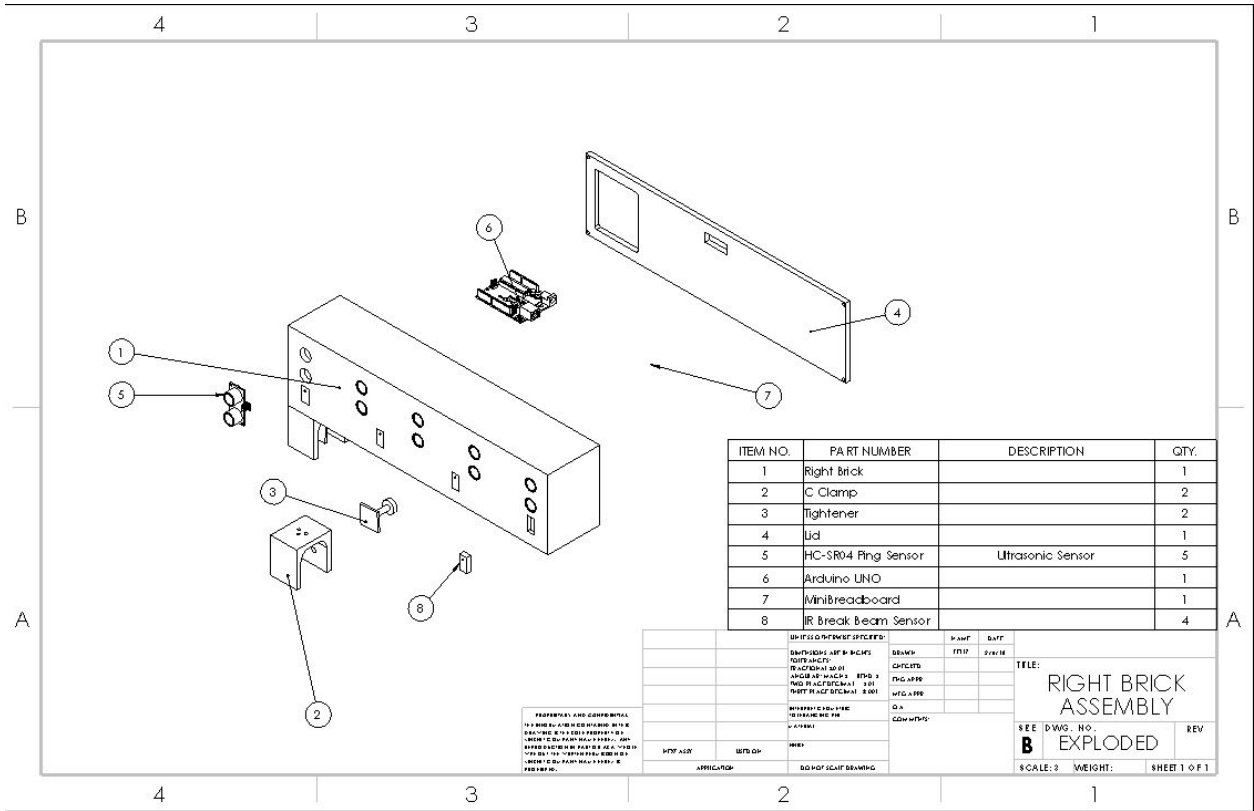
Exploded view of right housing assembly with attachments and electronics. Breadboard currently missing.
